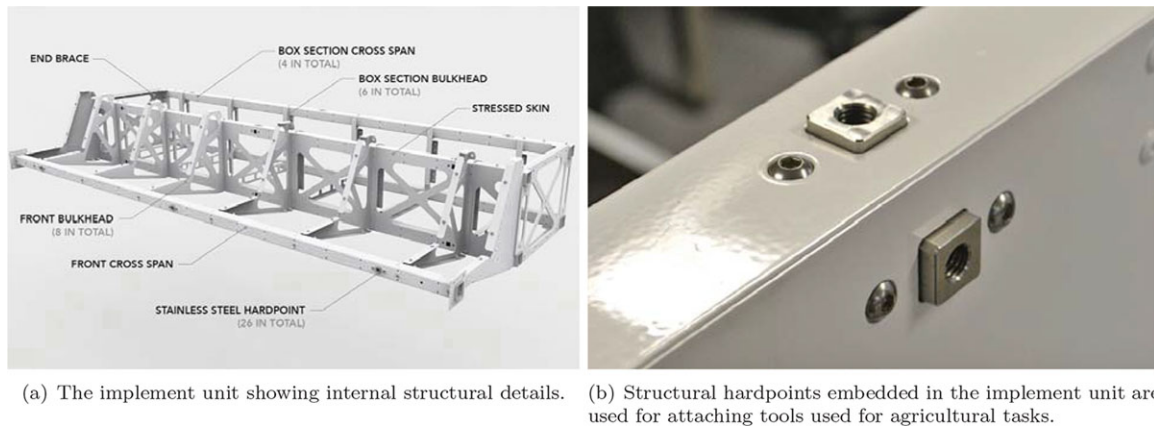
The implement unit is designed with a semi-monocoque construction from CNC laser cut and folded components, riveted together
